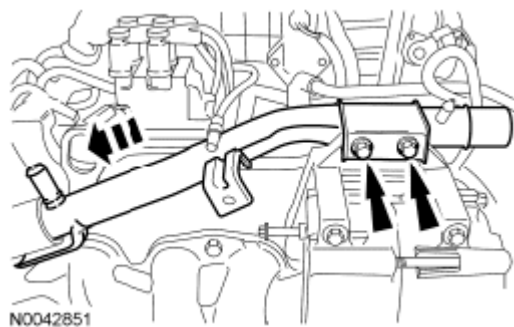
Locating Front Coolant Outlet Pipe Bolts
